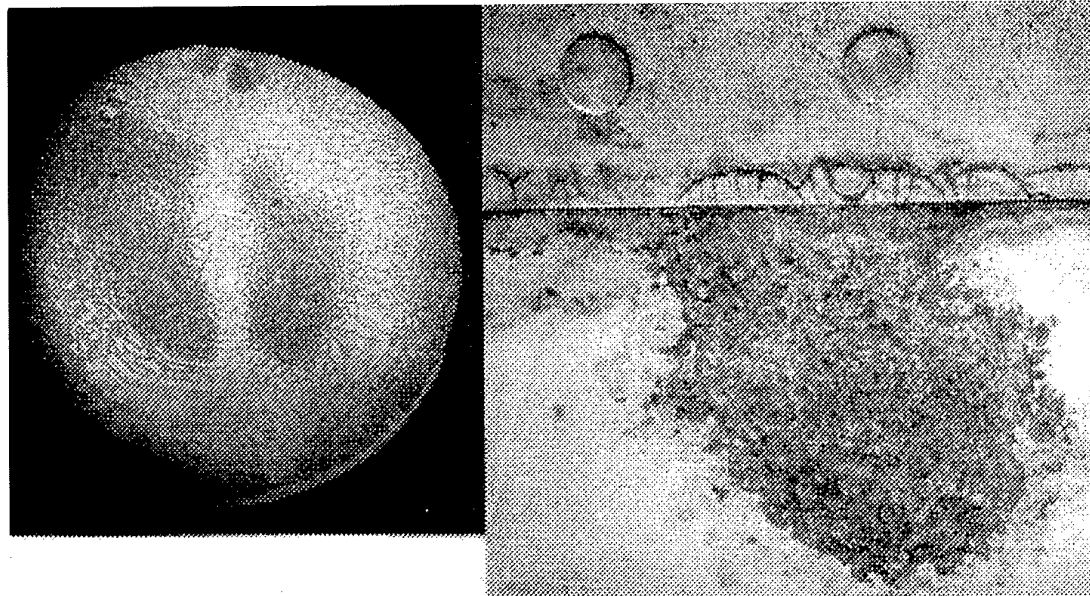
MOI Image of Cracks at Fastener Holes
